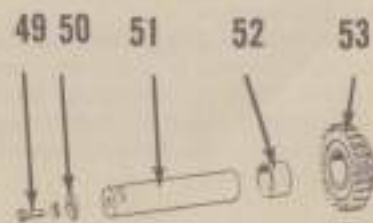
Exploded view of the D-17 reverse idler gear and shaft. Bushing (52) is renewable.
